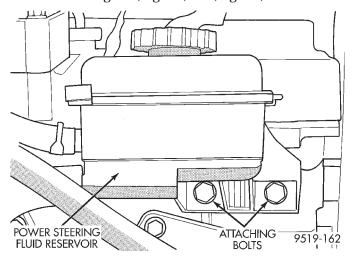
Power Steering Fluid Reservoir Mounting 2.0 And 2.4 Ltr. Engine
